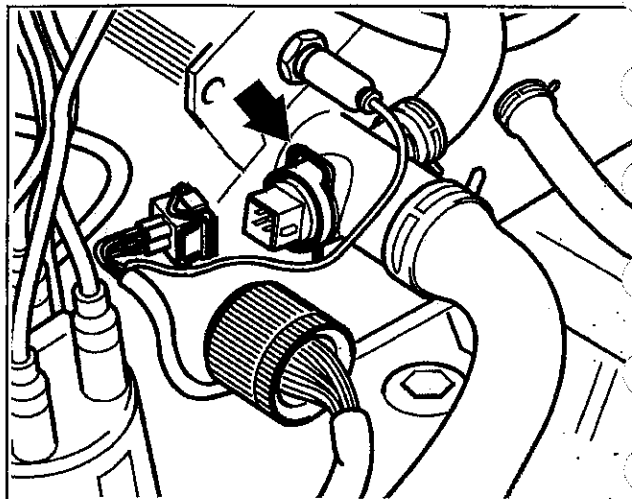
ECT sensor retaining clip (arrow) on 4-cylinder engine.
